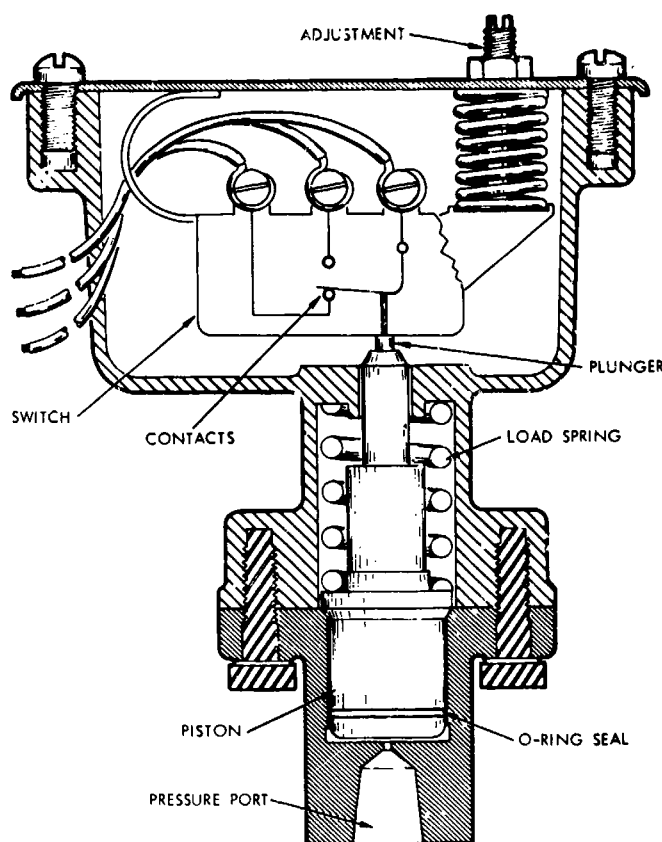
Pressure Switch With a Piston-Sensing Element
